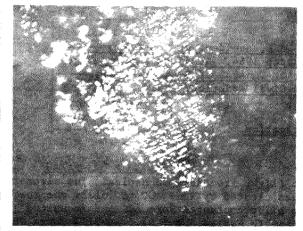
500X MICROPHOTO SHOWING STRIATED PATTERN OF FRACTURE SURFACE
